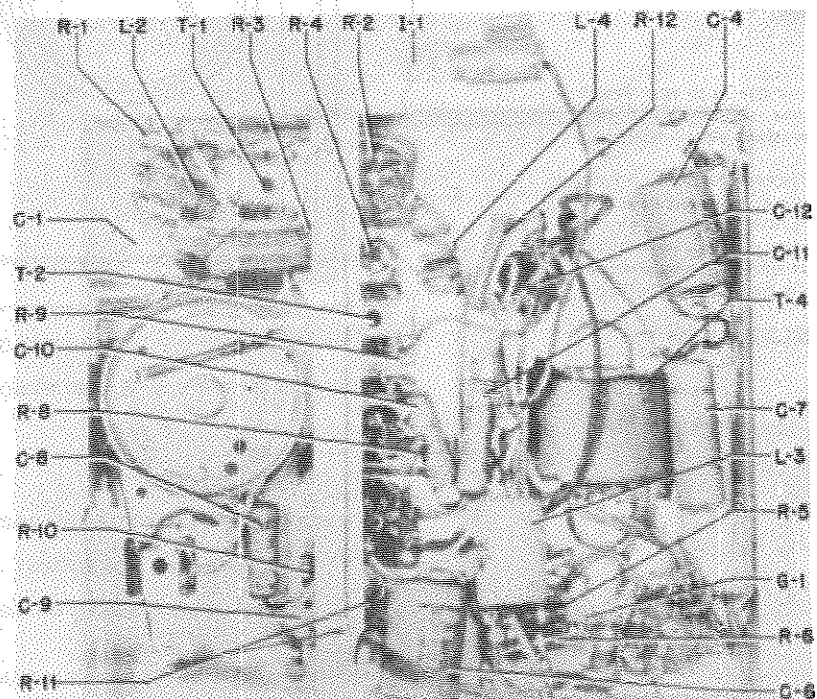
PARTS LOCATION - CHASSIS BOTTOM VIEW
